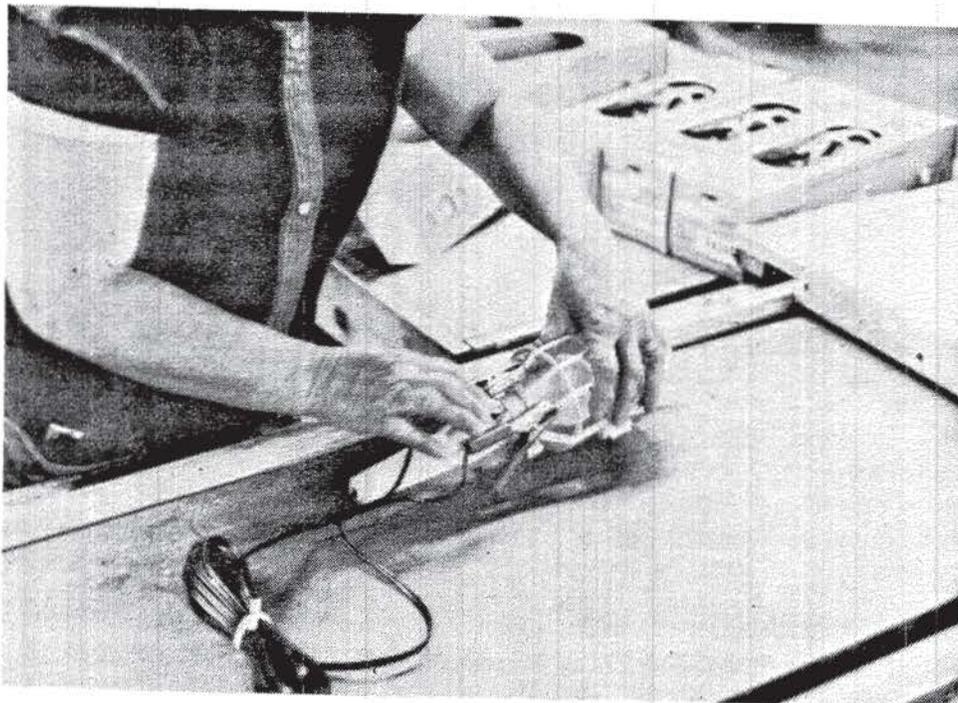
Attaching cable ends to housing on light socket assembly before packing.
